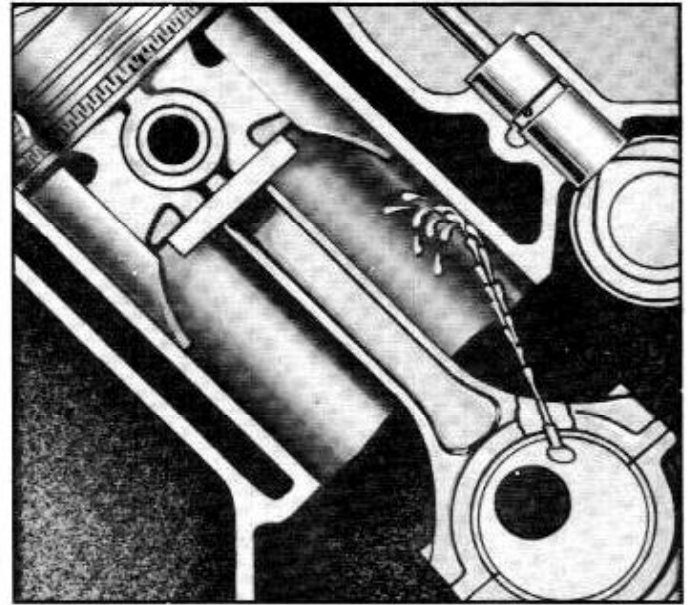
C-9—Lubrication of Connecting Rod Bearings and Cylinder Wall
